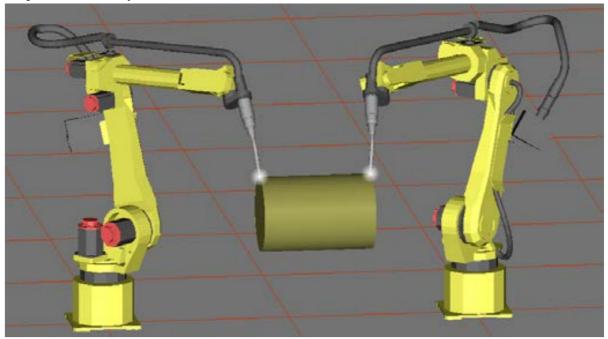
Arc Welding Robots Welding a Round Tank
